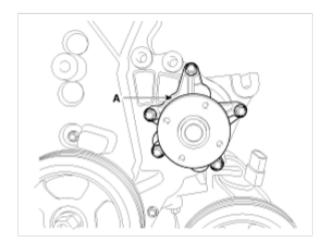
Identifying Water Pump Courtesy of HYUNDAI MOTOR AMERICA
